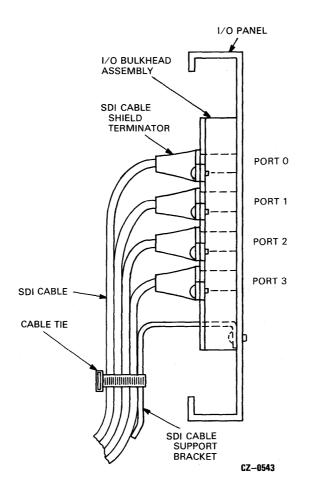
Clamping the SDI Cables to the Support Bracket
